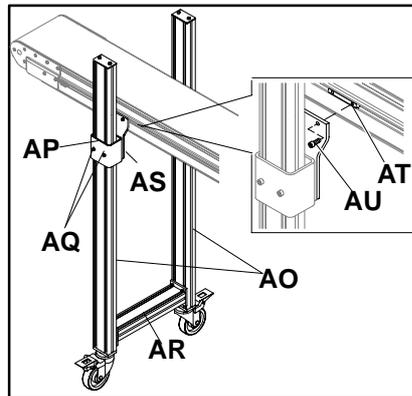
Fully Adjustable Aluminum Stand and Adapting Components for an LPZ Conveyor
